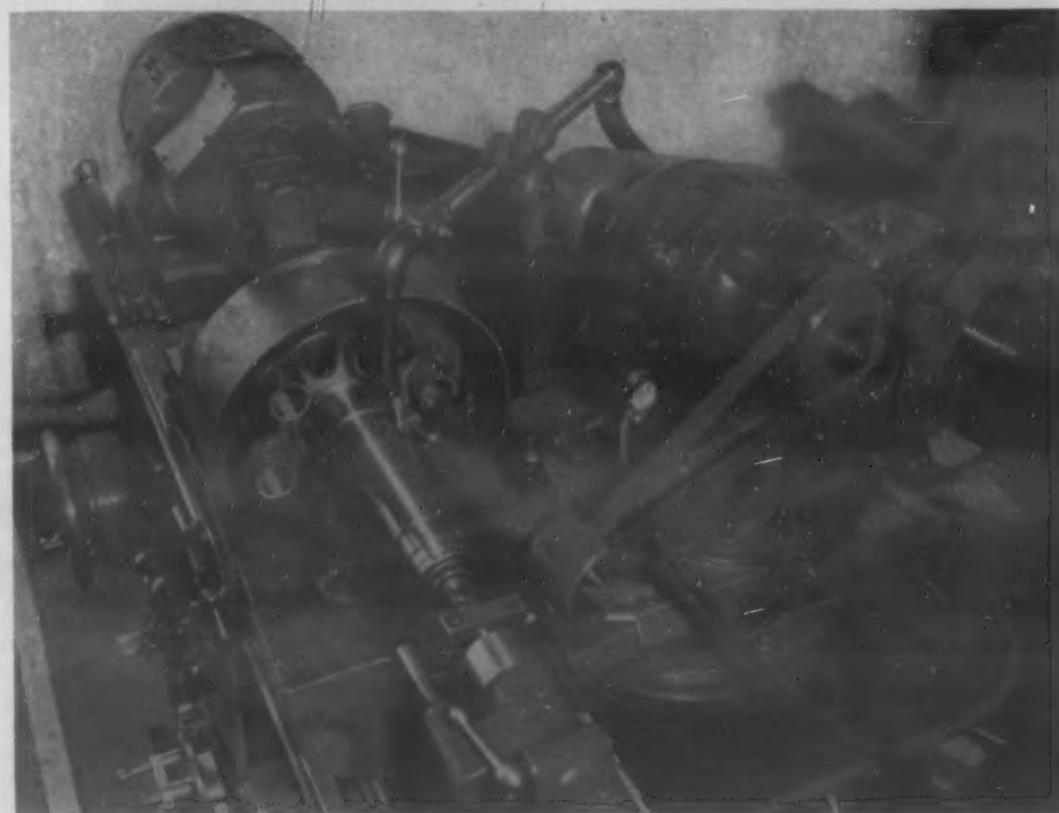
A universal grinder (16 x 36) grinding the external diameter of an aircraft radial engine part with an internal wheel. (Courtesy: Norton Co.)
